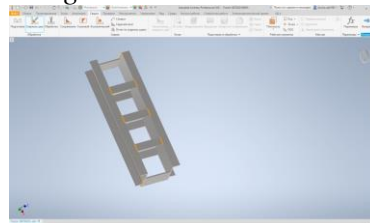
3D view of the structure, welds are marked in orange
